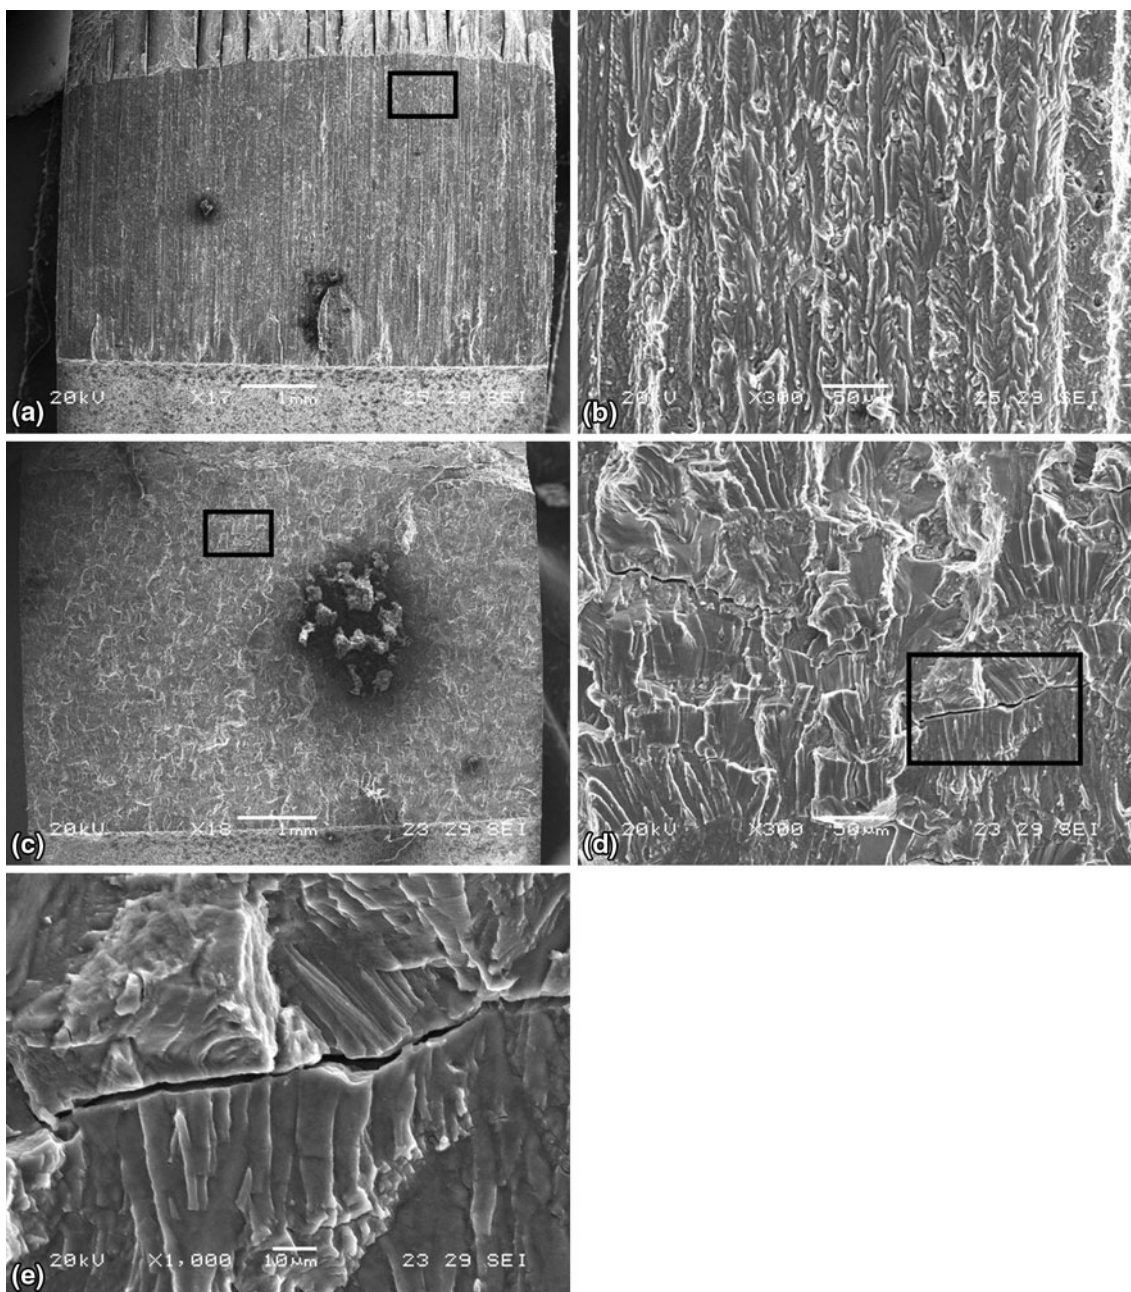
(a) 17× magnification of 7075-T7631 specimen fracture surface. (b) 300× magnification of stress corrosion cracking region of 7075-T7631 specimen. (c) 18× magnification of 7050-T7451 specimen fracture surface. (d) 300× magnification of stress corrosion cracking region and secondary cracking of 7050-T7451 specimen. (e) 1,000× magnification of secondary cracking in 7050-T7451
